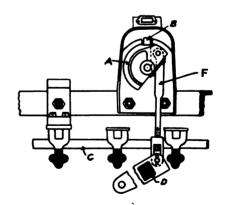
Cross Sectional View of Electric Lock, Fig. 2331.
